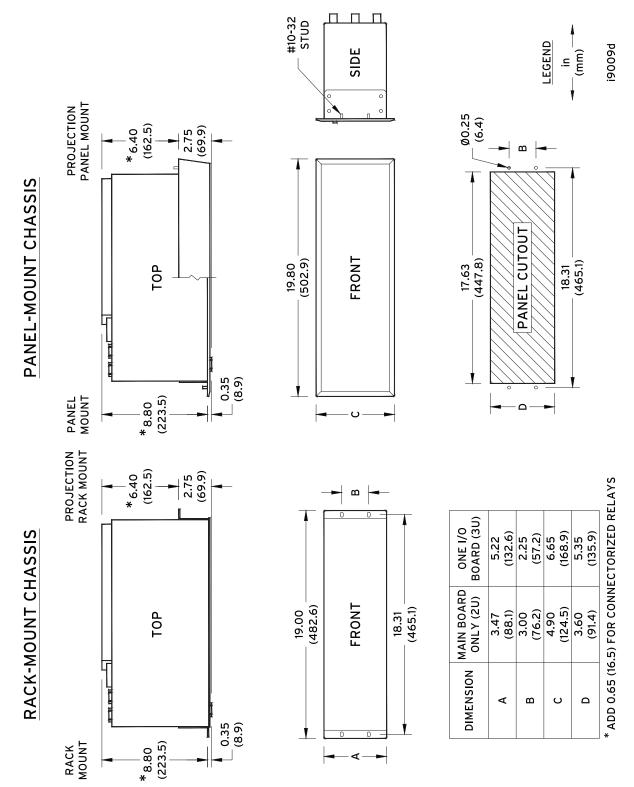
SEL-387 Dimensions for Rack- and Panel-Mount Models
